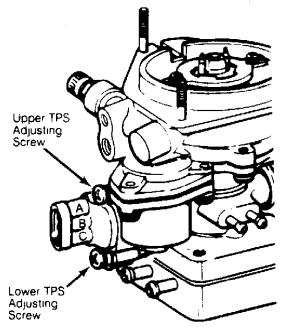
Adjusting Throttle Position Sensor (Man Trans) Courtesy of Chrysler Motors.
